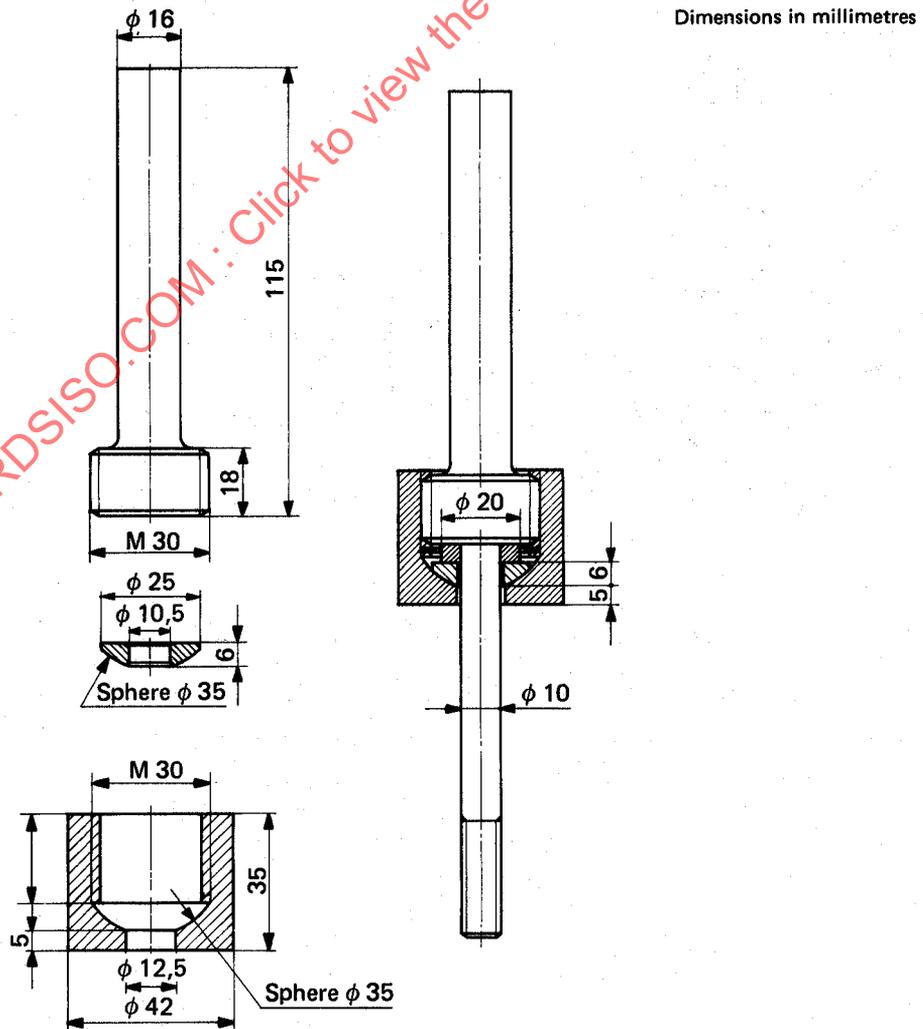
Fixture for tensile loading, Type I test pieces
